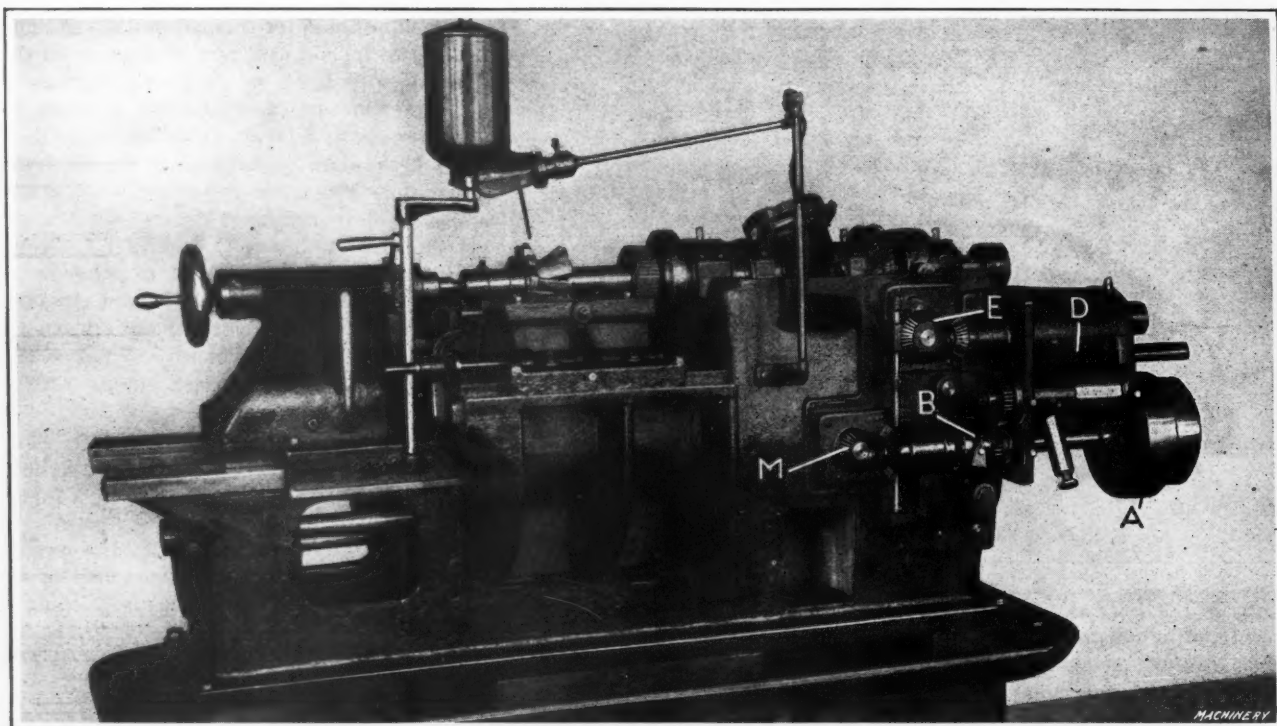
Rear View of Automatic Machine for relieving "Curvex" Cutters, showing Arrangement of Drive
